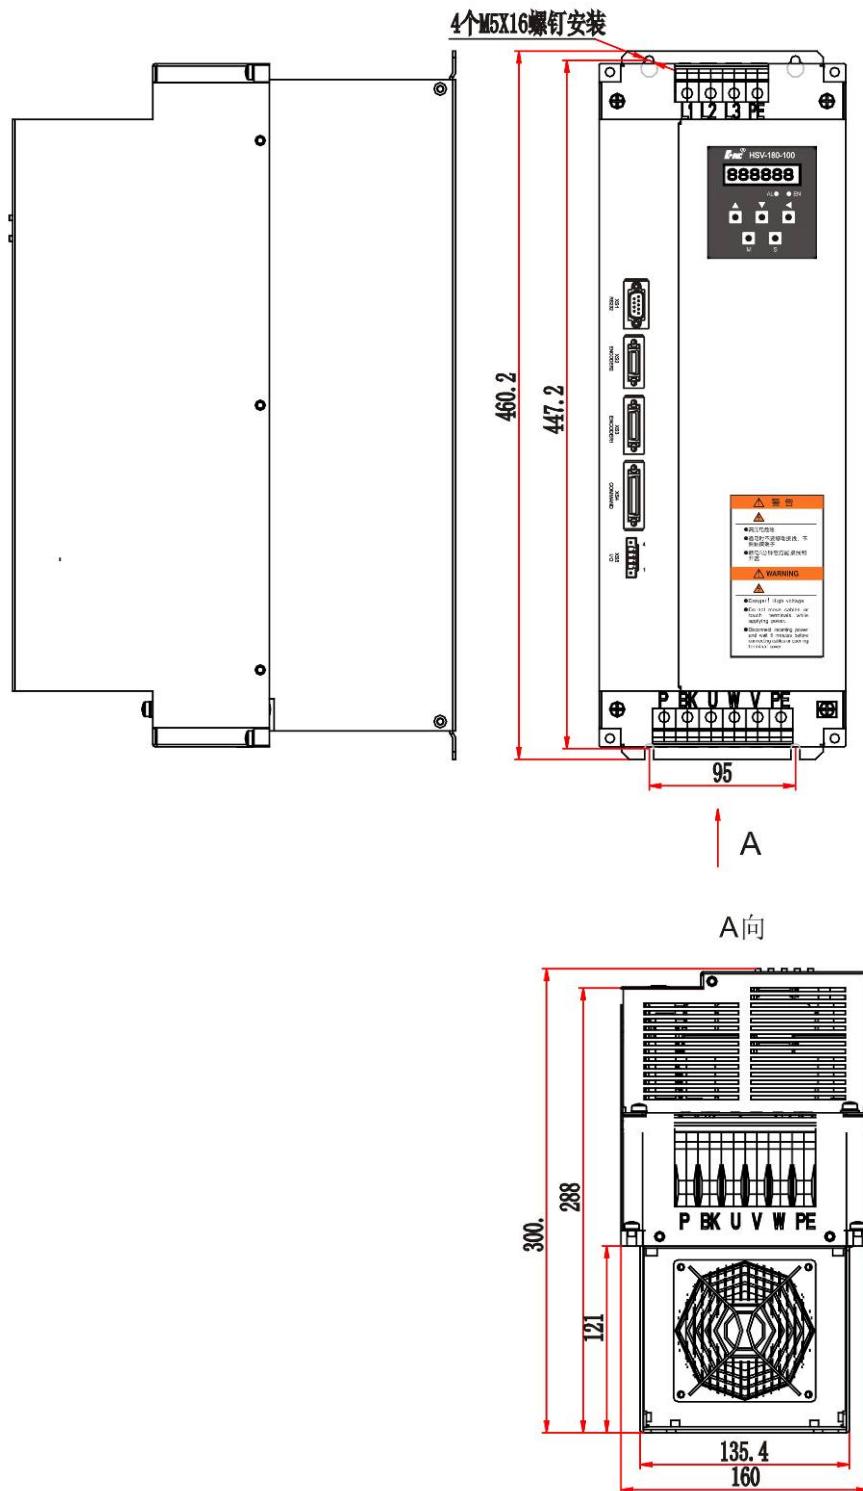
Dimension and size of HSV-180AS-100, 150 (with auxiliary devices Unit: mm)
